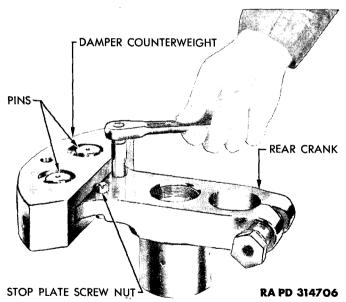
Loosening Nuts Securing Rear Crank Stop Plate Bolts
